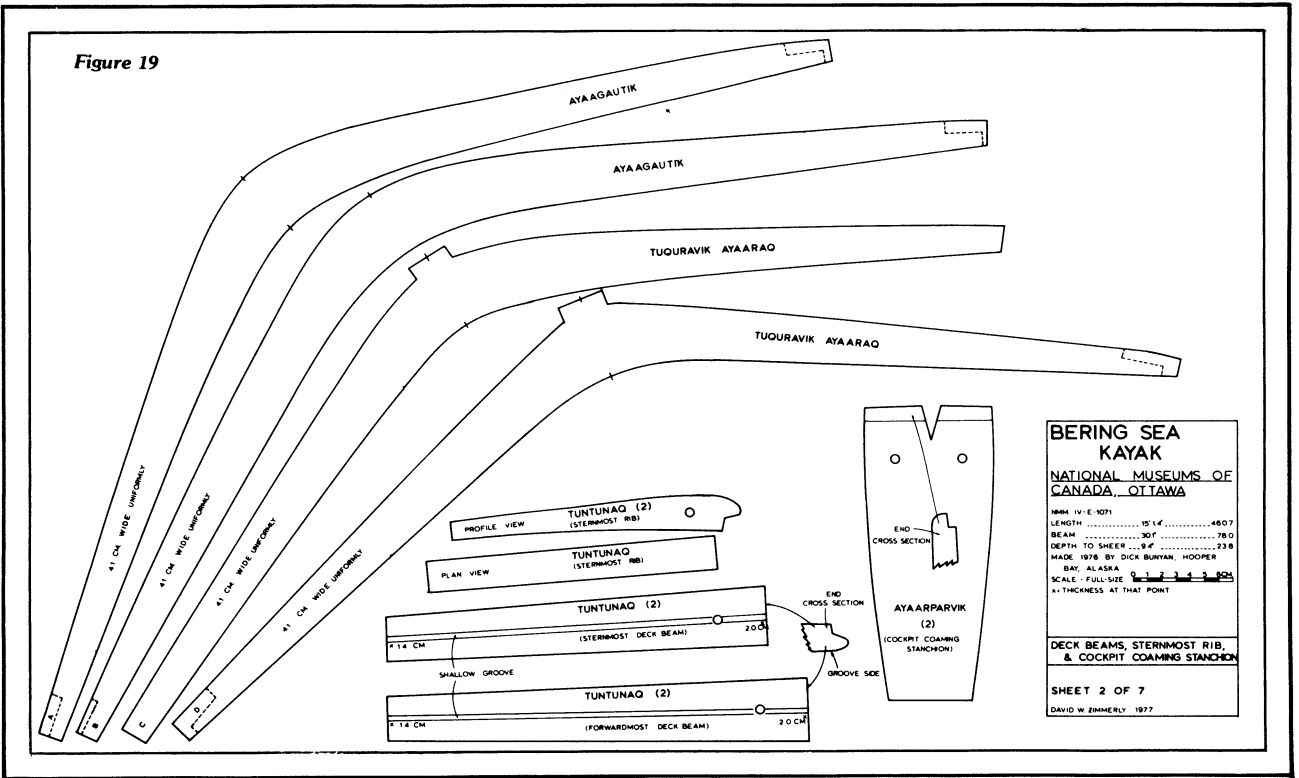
Full-size drawing (shown photo-reduced) of Hooper Bay kayak parts
